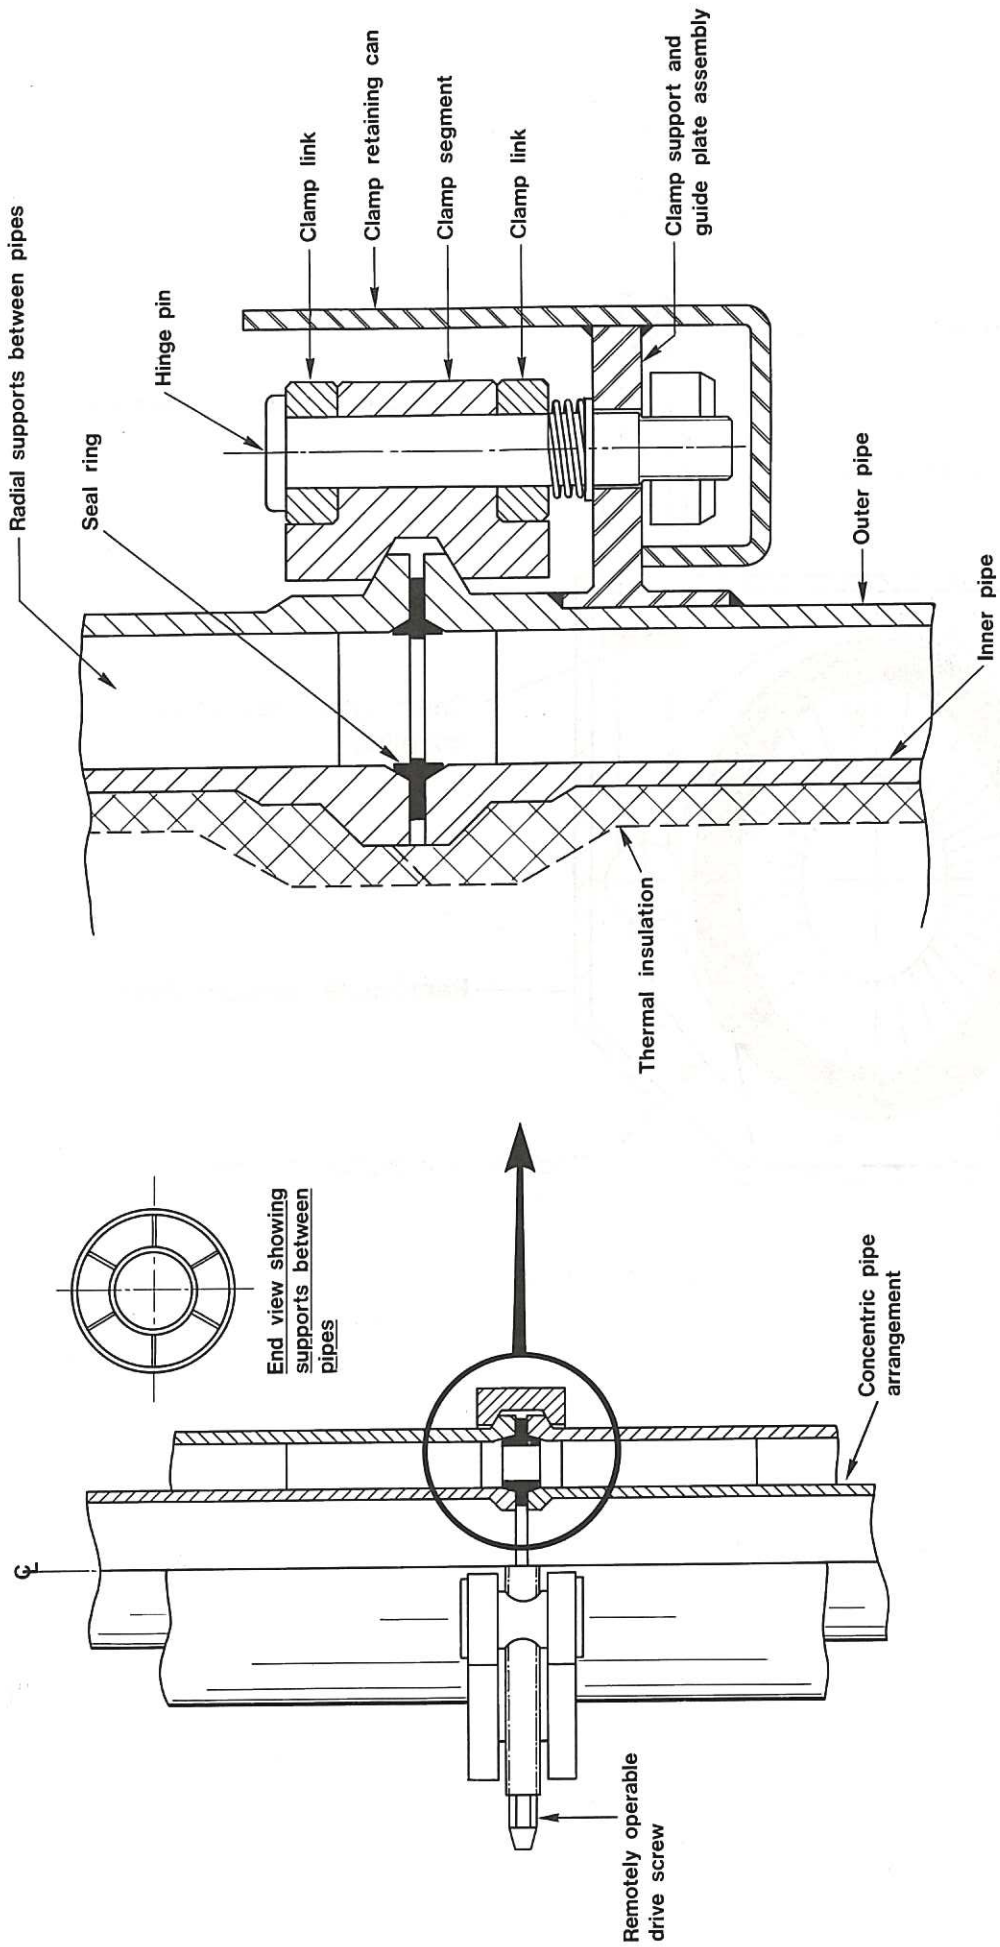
Possible scheme for joining Concentric Pipe Arrangement, using a Mechanical Coupling.
